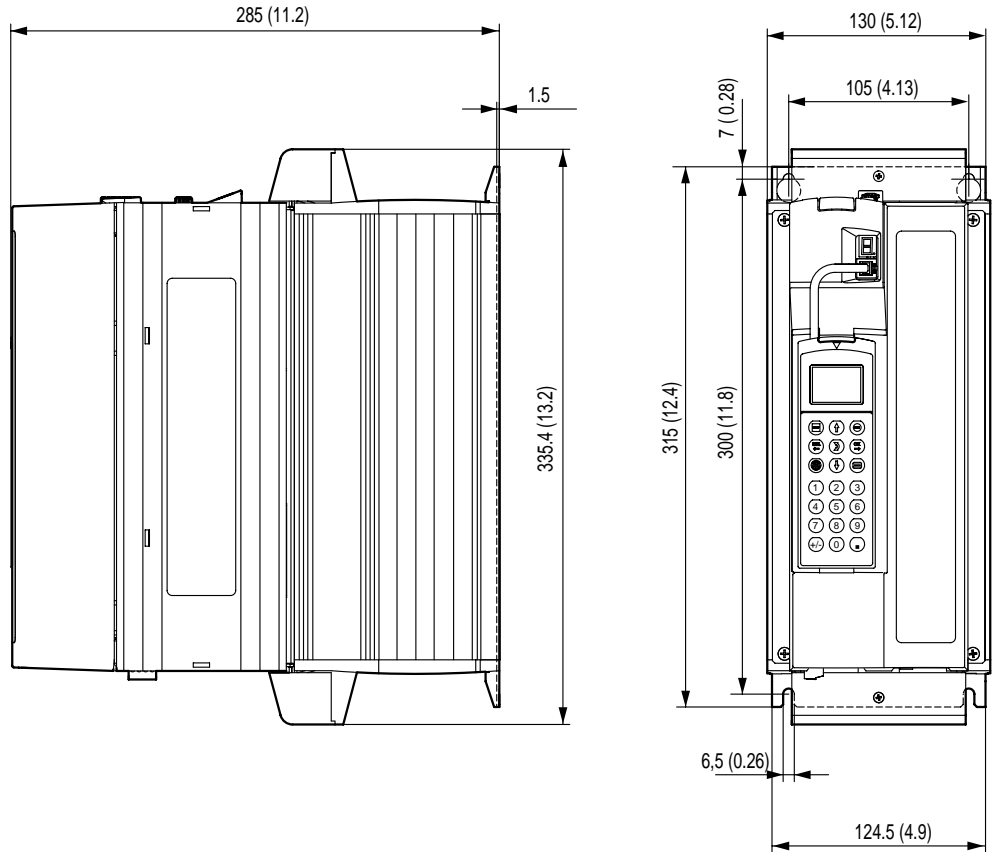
Dimensions for MDX61B size 2S, dimensions in mm (in)
